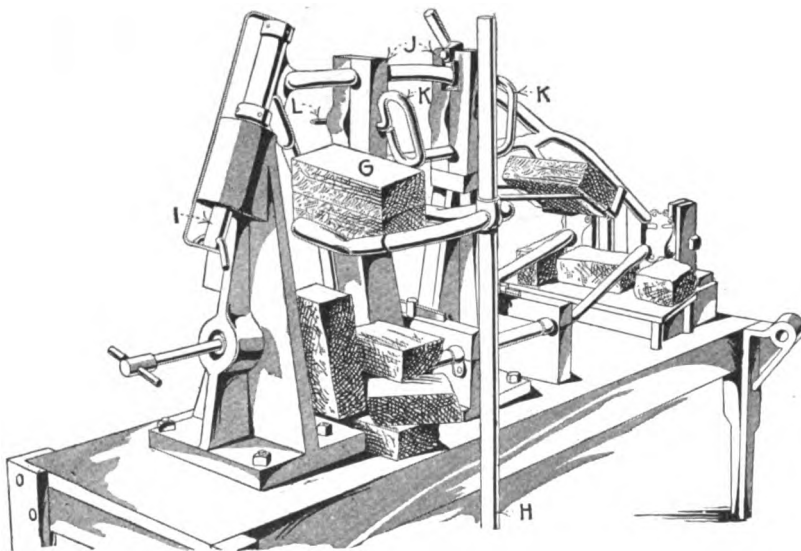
ANOTHER VIEW OF BRAZING FIXTURE
